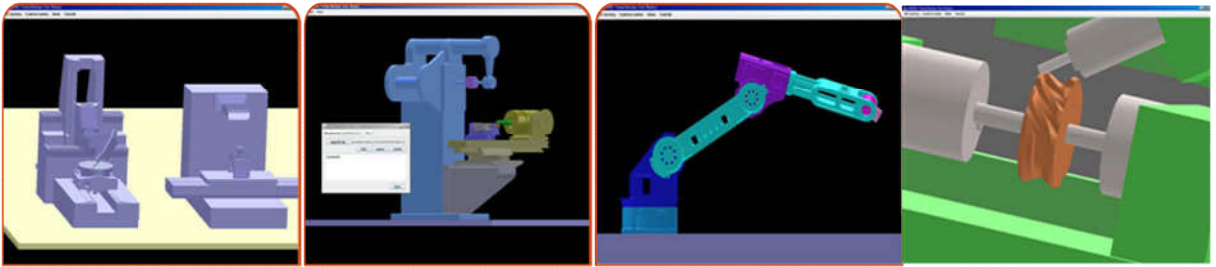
Virtual machine tools, constructed using the universal virtual machine tool construction system: (a) Two virtual, five-axis machine tools constructed in the same environment, one of which is milling a workpiece with free surface, (b) Virtual five-axis horizontal machine tool, (c) Virtual robot arm, with 6 degrees of freedom, (d) A roller gear cam milling simulation, for a virtual five-axis machine tool.
